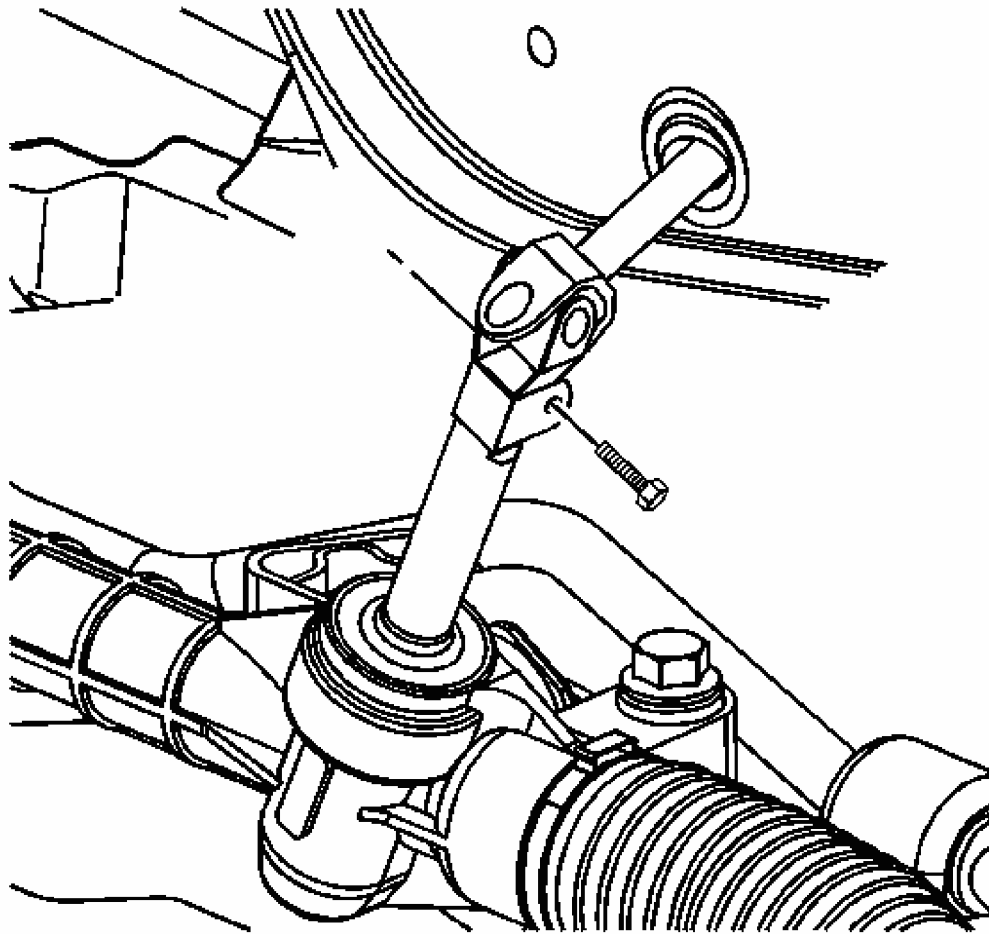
View Of Intermediate Shaft-To-Steering Gear Pinch Bolt
